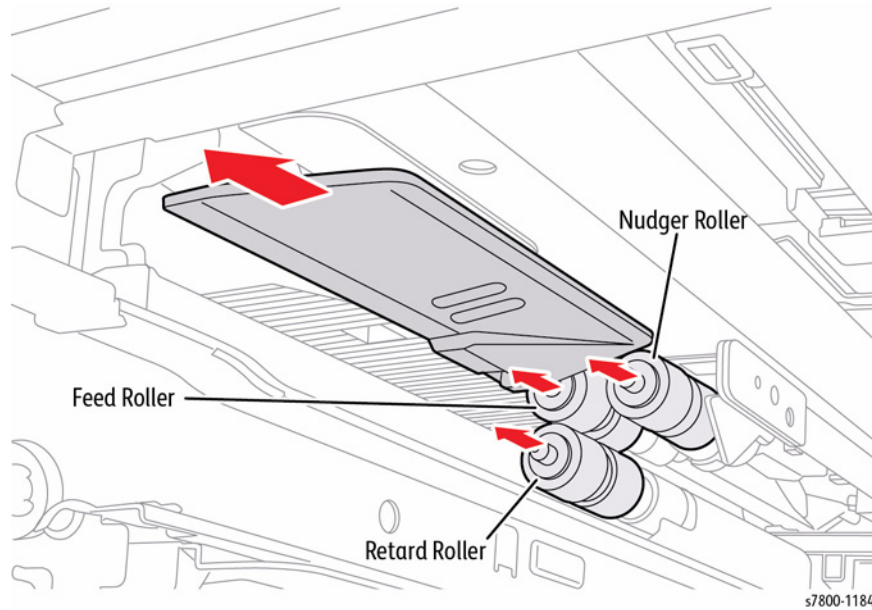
Removing the Tray 5 Feed/ Retard/ Nudger Roll
